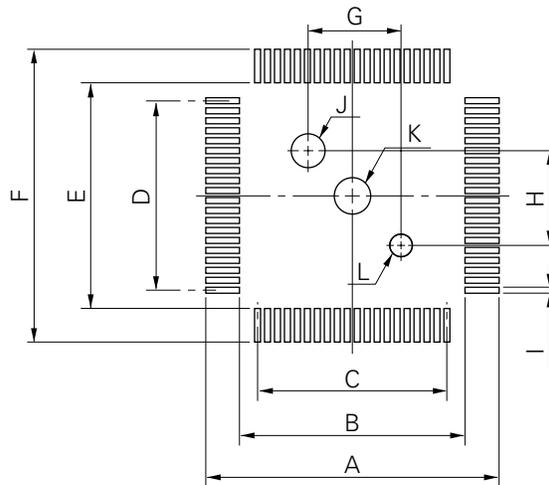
Dimensions of EV-9200GC-80 (reference)
